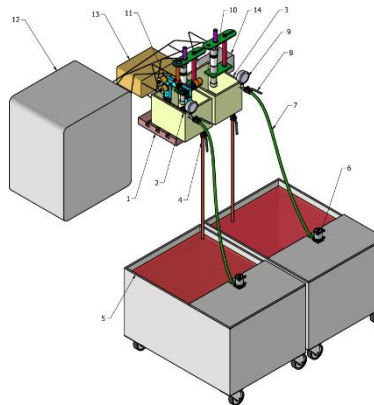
Hybrid technology equipment assembly (W)EDM-ECM+US
